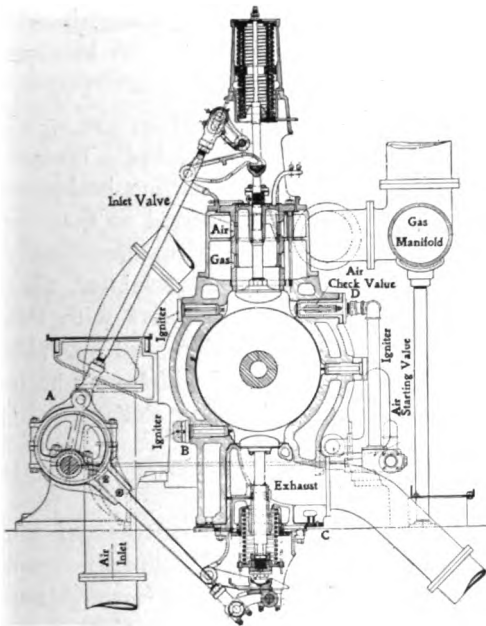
DETAIL CROSS-SECTION OF GAS ENGINE THROUGH VALVE CENTERS
